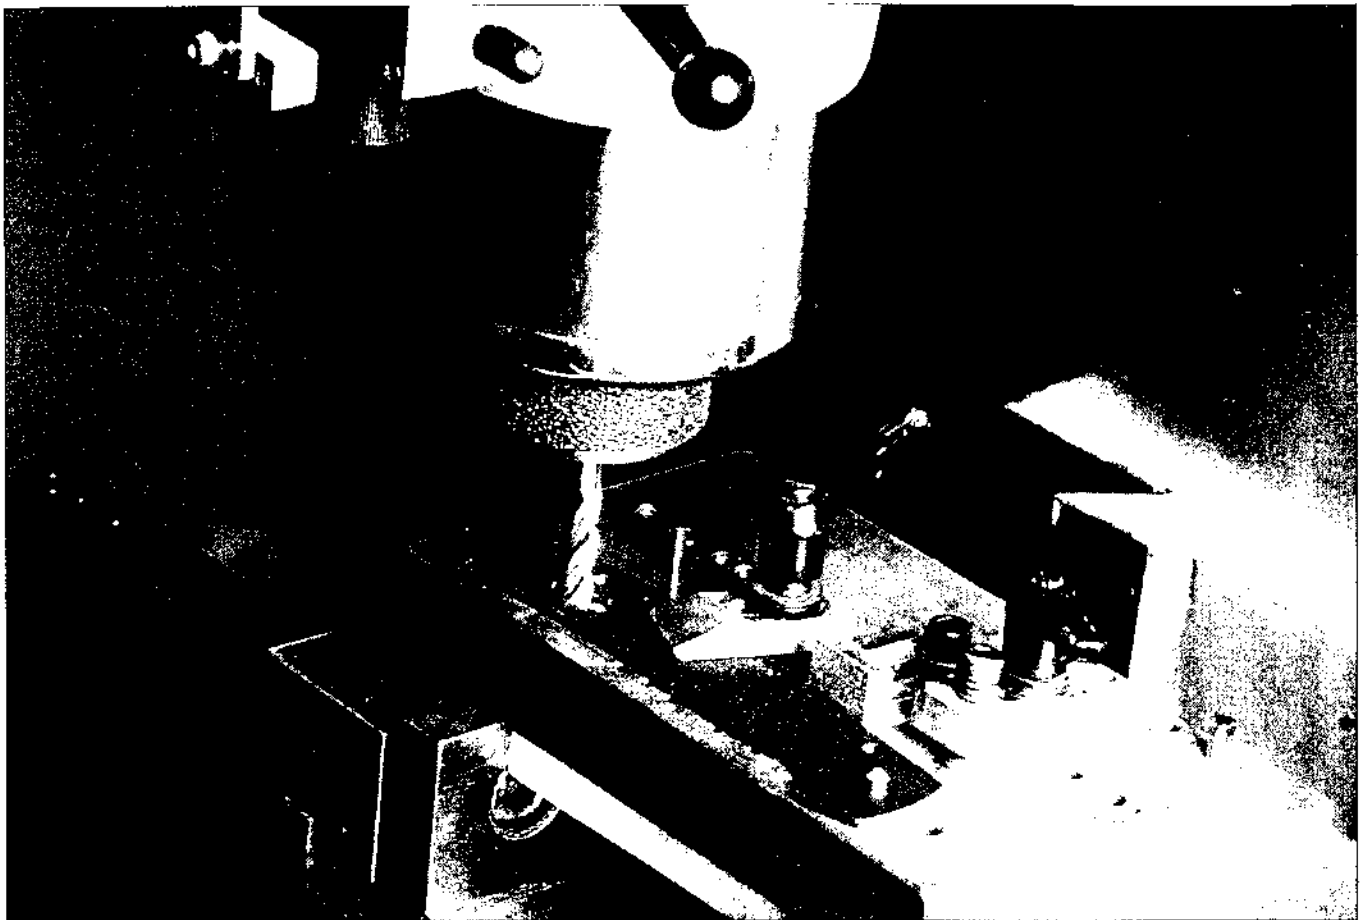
Milling the spring release scallop or cutout with a 3/4-inch carbide cutter.
